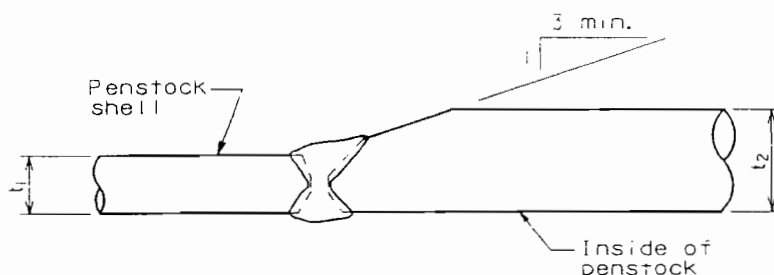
Change-in-Thickness Transition (Butt Weld)
